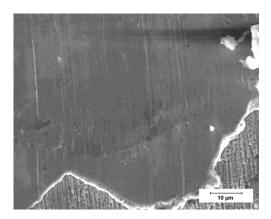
Microscopic image of fatigue zone of the fatigue fracture of the cracked wire coming from tire No. 1, shown in Fig. 3. SEM.
